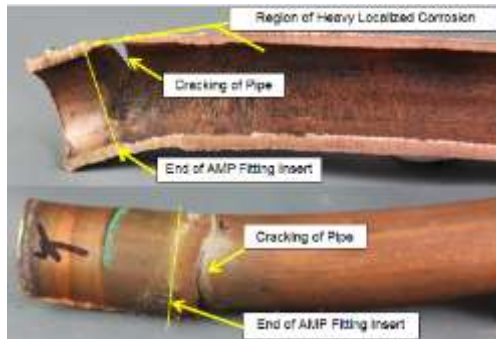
Localized Corrosion Failure at AMP Fitting Outlet
